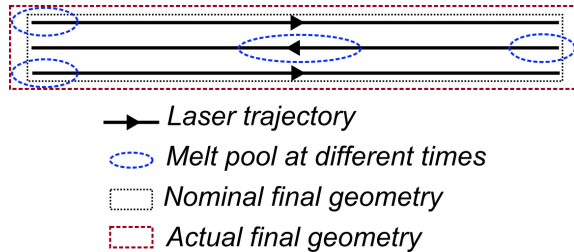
Mechanism of oversized dimensions due to the melt-pool
